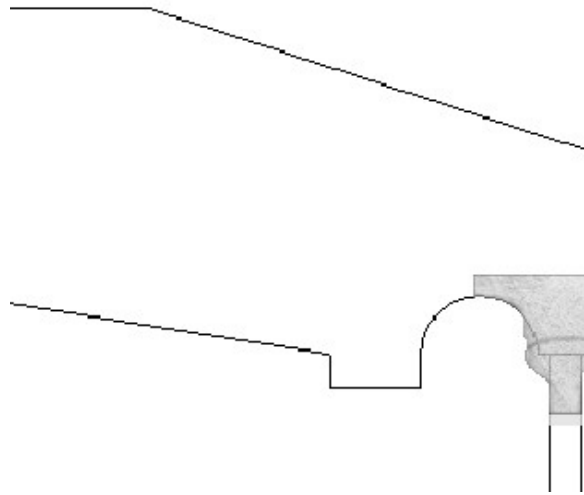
Illustration of s section through resistance welding end closure (after removing the outside weld flash).
